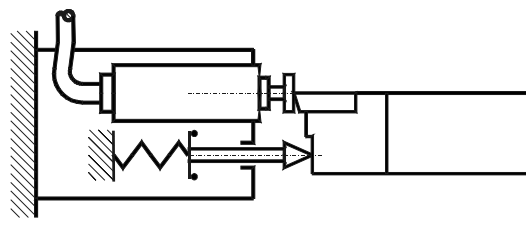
Tool probe system with a touch sensor and linear variable displacement transducer.
